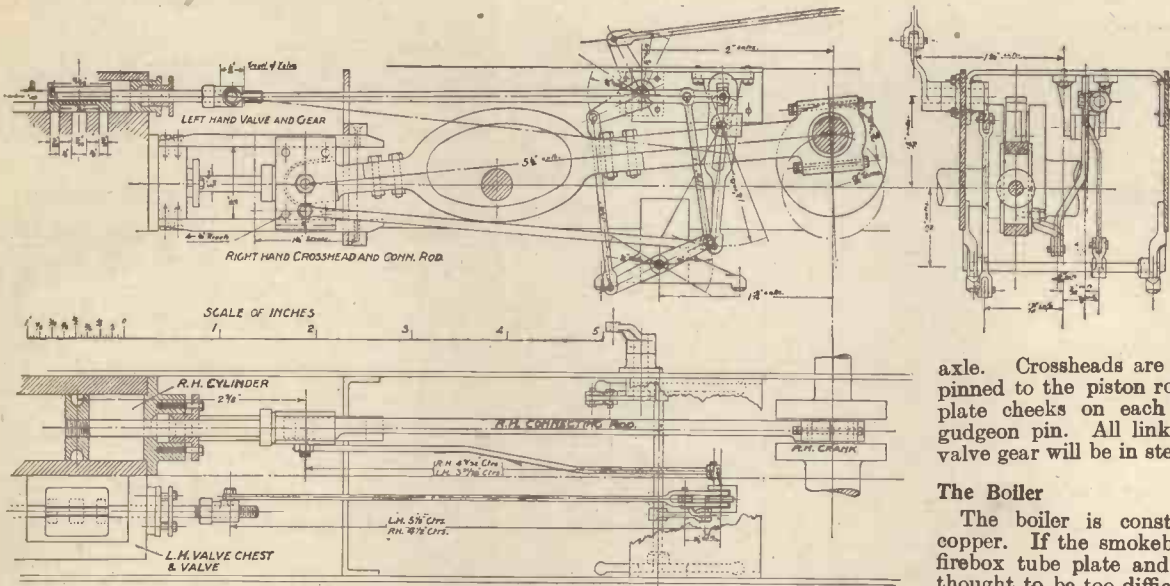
An enlarged detailed drawing of the motion and valve gear.
